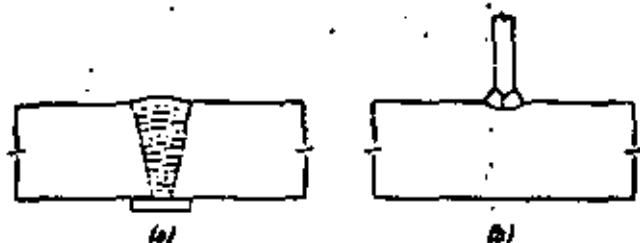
A groove-welded butt joint in thick plate (a) requires a higher preheat, because of joint restraint, than a fillet-welded joint of a thin member and a thick plate (b). See Section 2.3 for the minimum size weld required by AWS.
